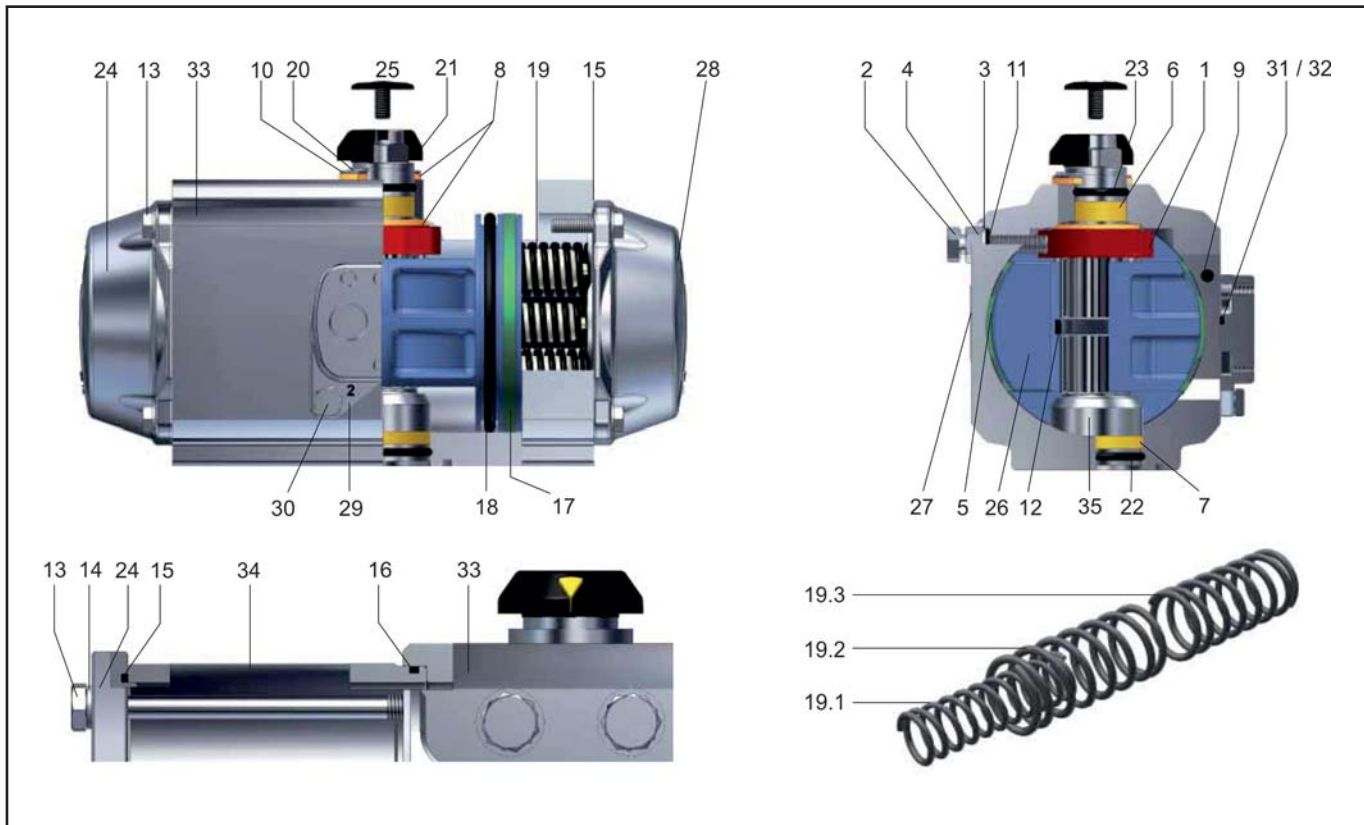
Forged stainless steel Rack and Pinion Actuator BR 31a
